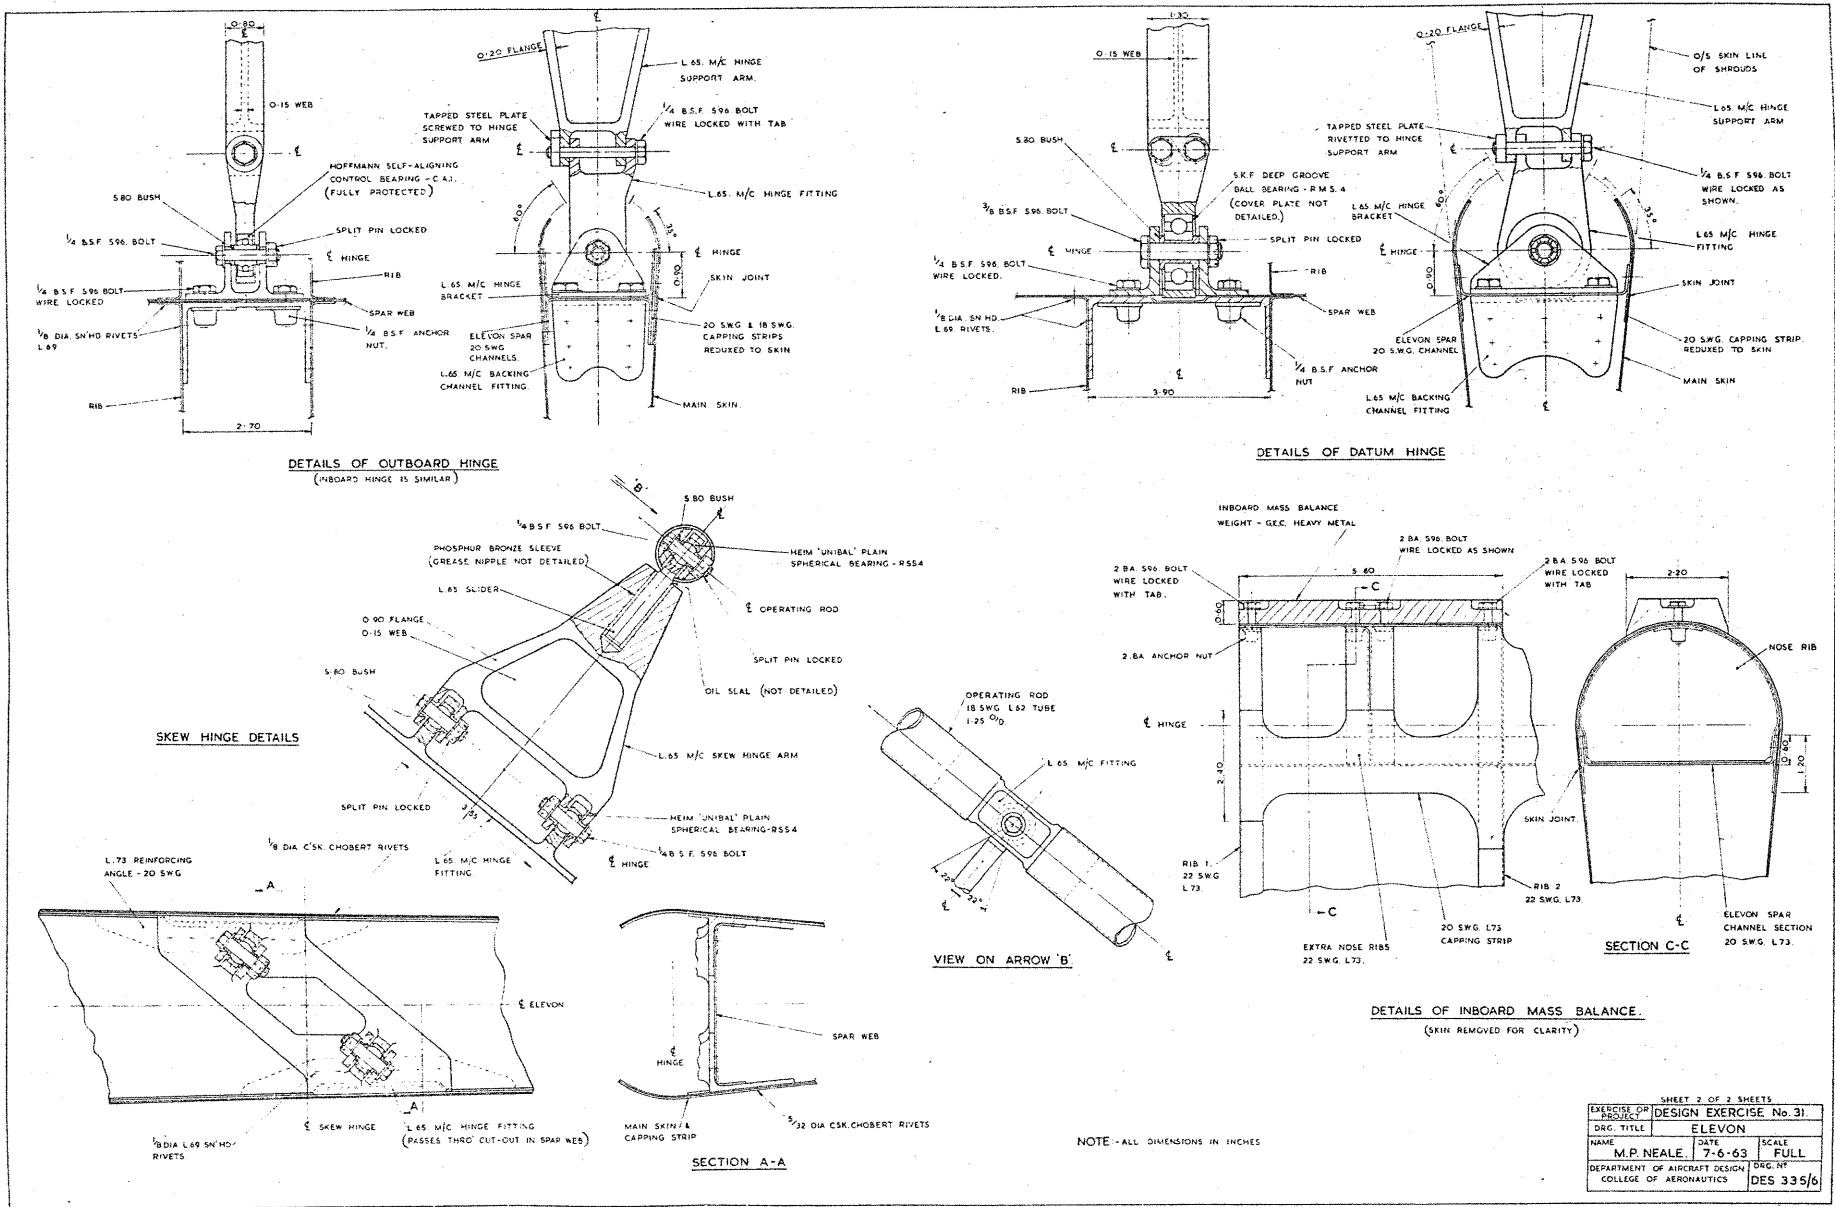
COMPLETED DRAWING OF 3rd TERM EXAMPLE - SHT. 2.
